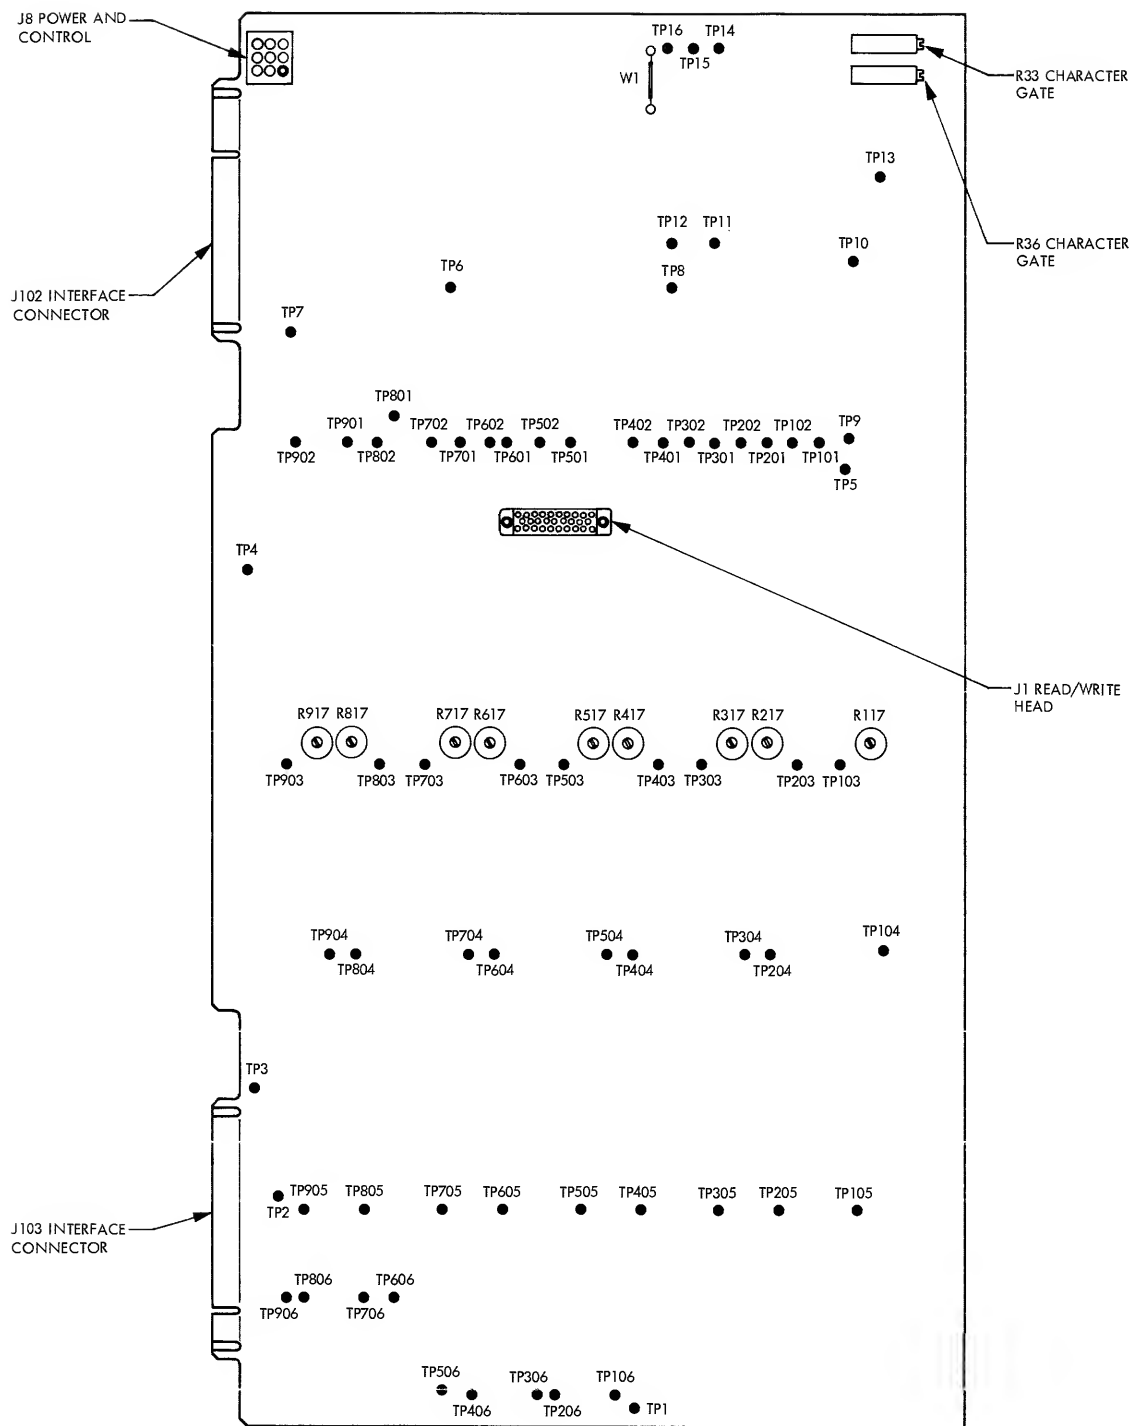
Data D1 PCBA, Test Point and Connector Placement
